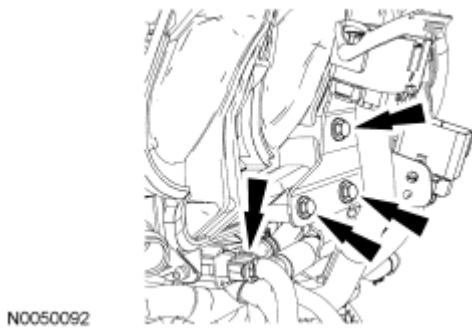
Locating Intake Manifold EGR Tube Bolt
